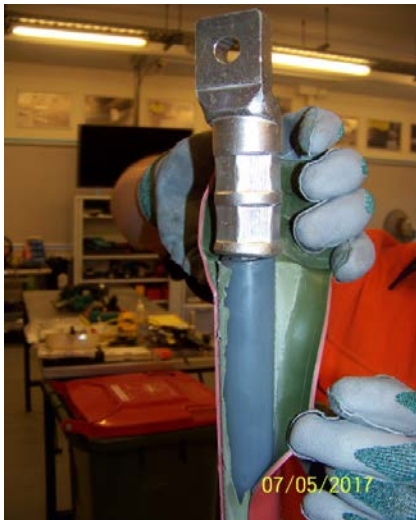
Pre-heat lug barrel and post heat lug palm. Soft blue flame for 3mins until a thin bead appeared top and bottom of the insulation tube
